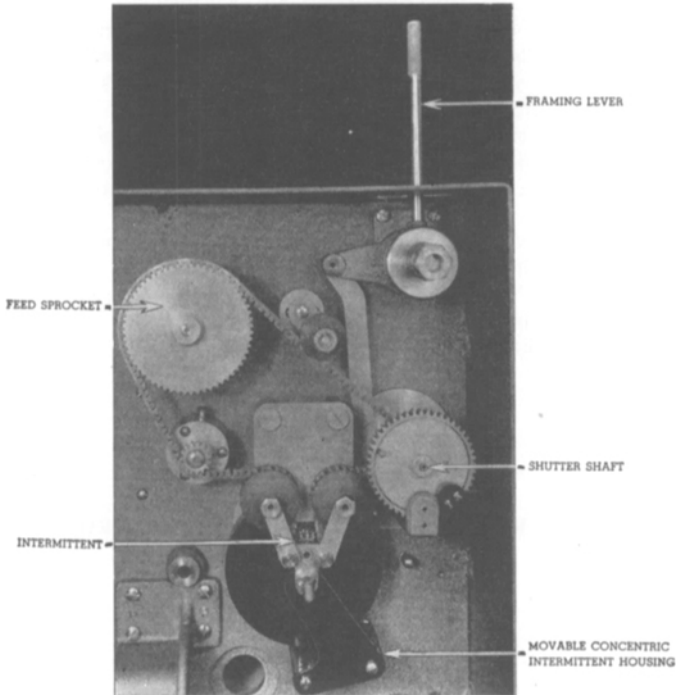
Framer in neutral position; moving lever to the right moves film up, and *vice versa*.
